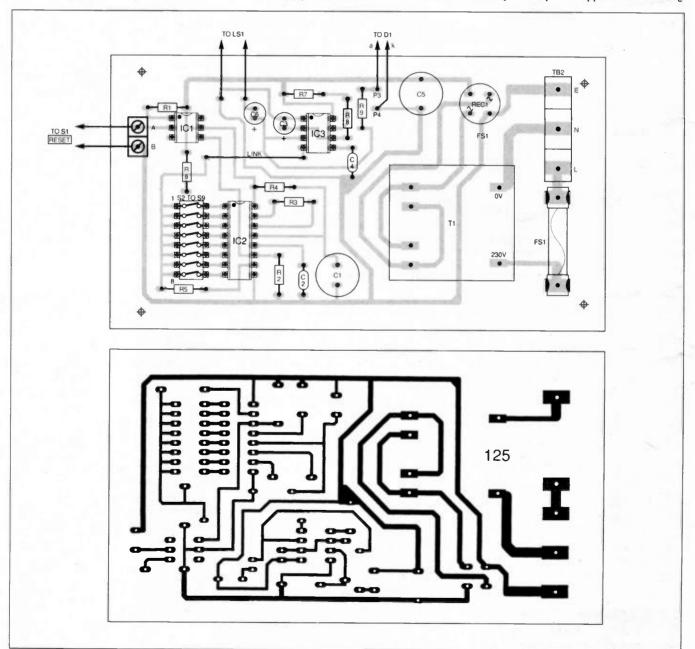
Printed circuit board component layout and full size copper foil master pattern.
